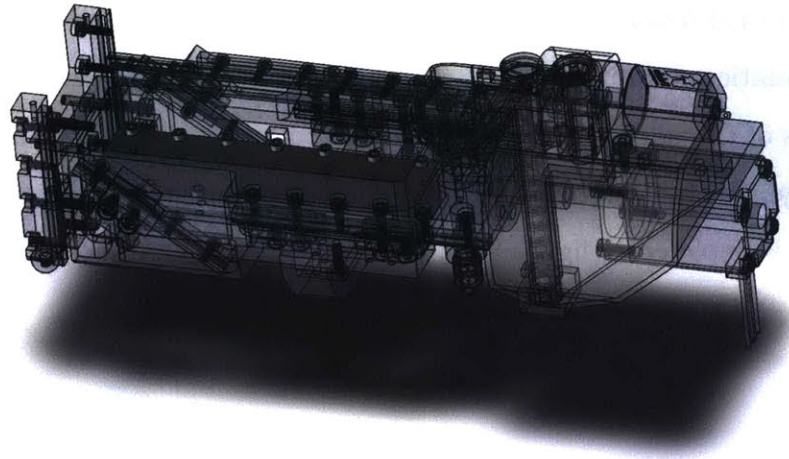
Multi-layer recoater assembly for the pressure vessel
